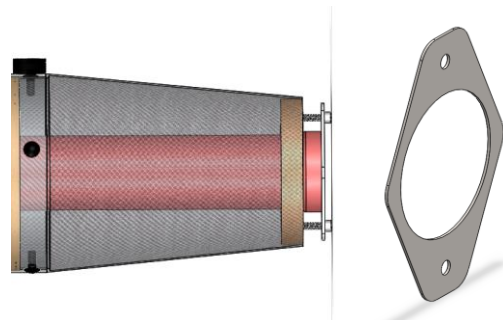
Primary components for aft-end motor retention; on left is the tail cone subassembly, and on right is the tail motor retention plate.
